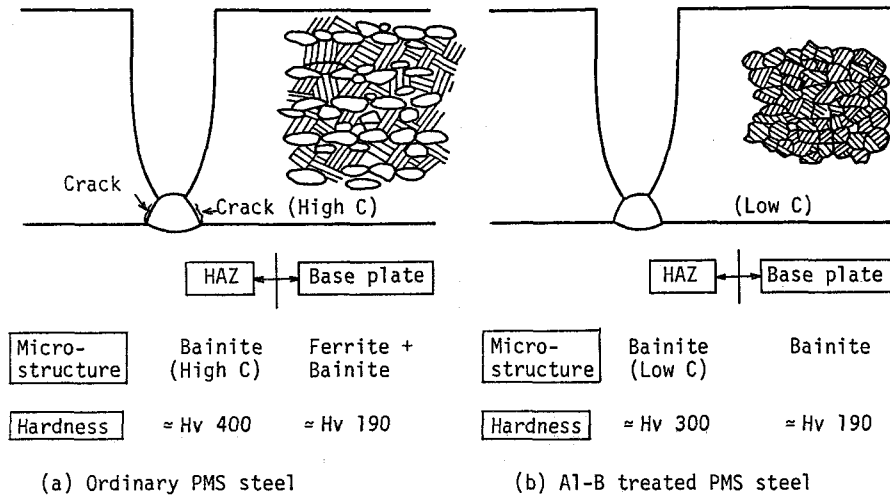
Schematic illustration for initiation of weld cold cracking
